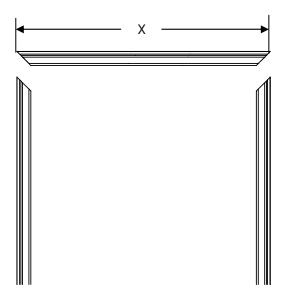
Cut the Top & Side Double Rails, Top & Side Rubber Seals, and Top & Side Air Foils at 45° angles.
